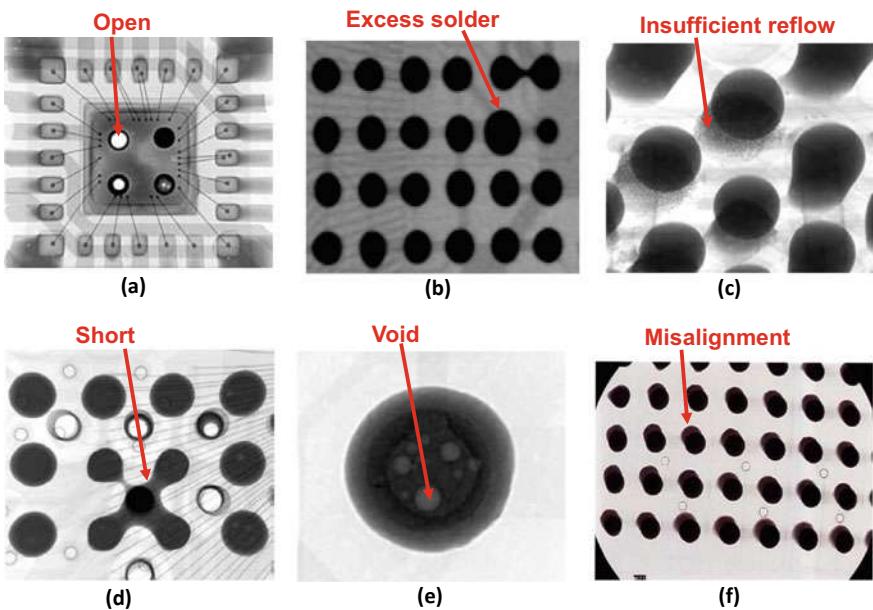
Typical examples of reflowed PCB assemblies
